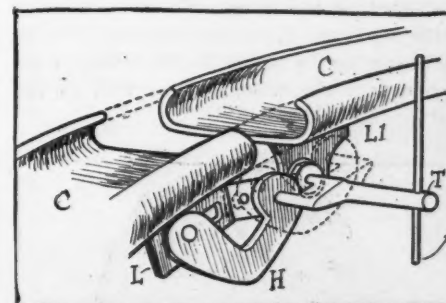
UNIVERSAL DEMOUNTABLE RIM ..
